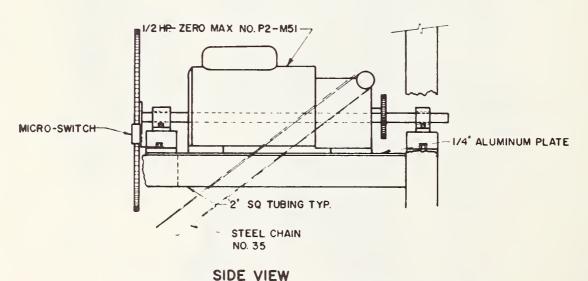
Arrangement of variable-speed drive unit and countershaft system.
